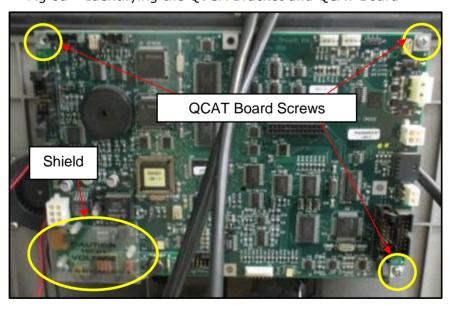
location of QCAT Board screws and "High Voltage" Shield
